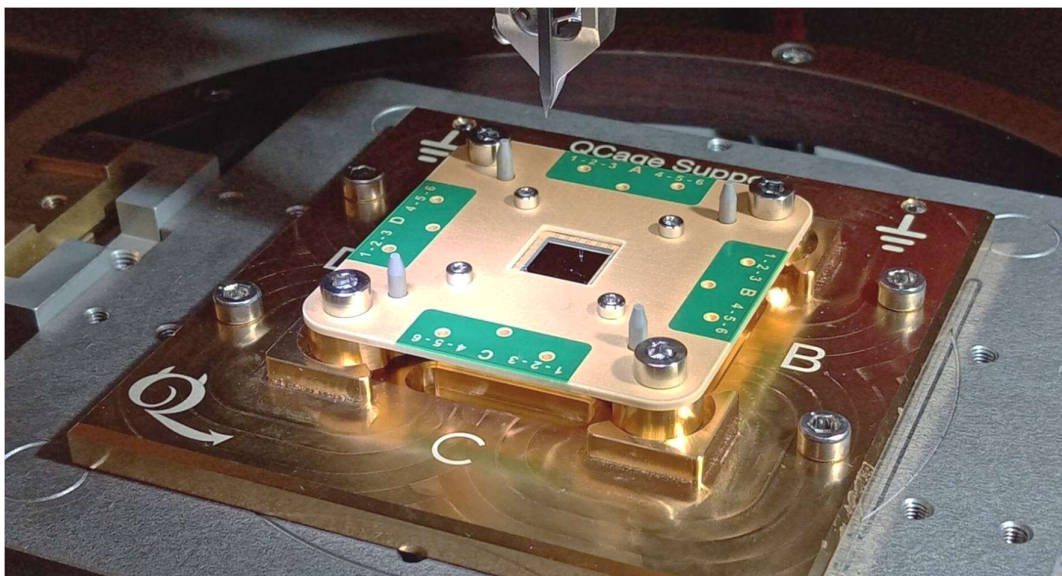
Fixture plate with support frame holding chip and sample board, mounted in aluminum wedge wire bonder.
